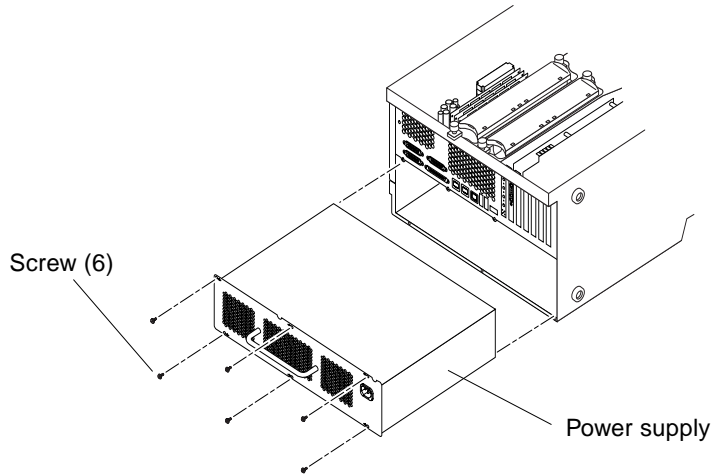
Removing and Replacing the connectors for the Power Supply Assembly
